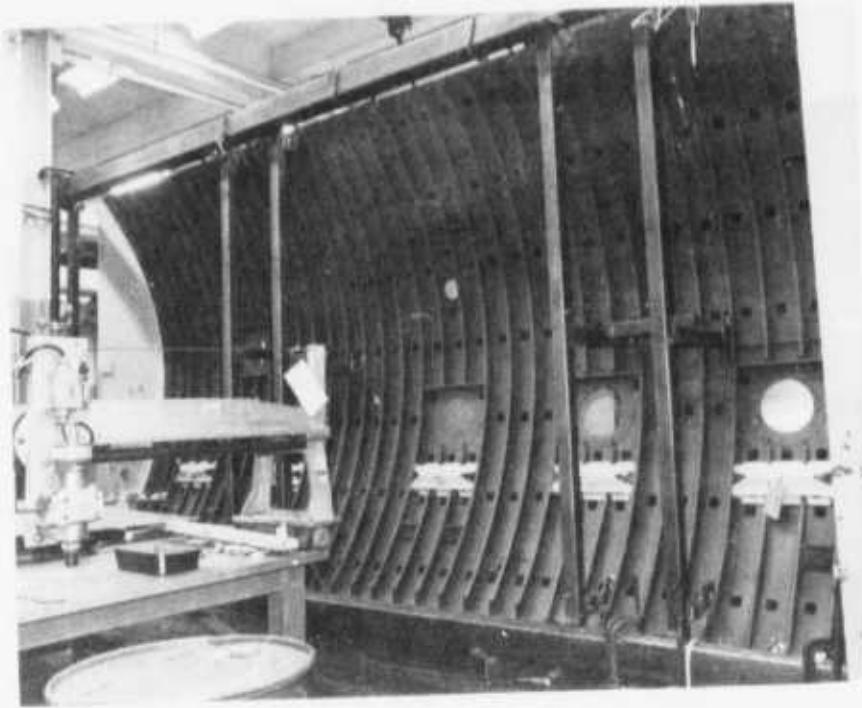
FUSELAGE SIDE PANEL MOUNTED IN JIG FIXTURE
